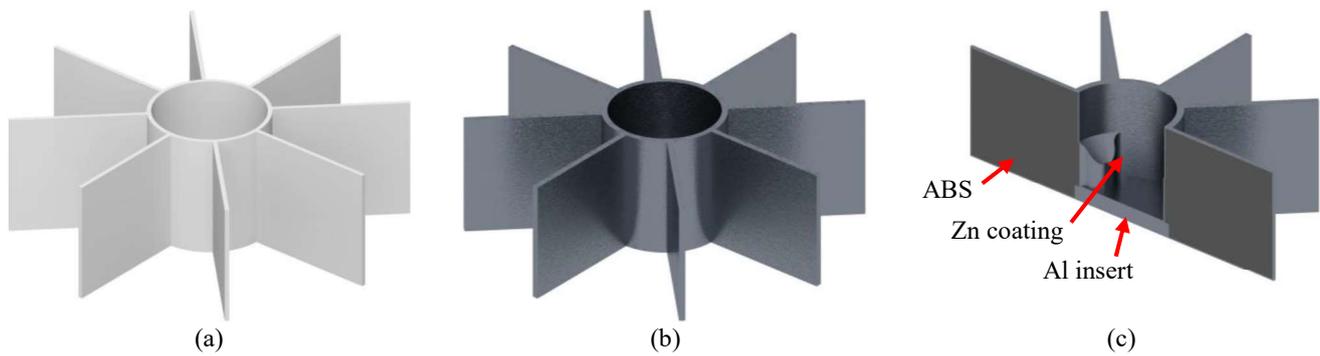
Heat sink design. (a) ABS heat sink, (b) zinc coated heat sink and (c) zinc coated heat sink with aluminum insert.
